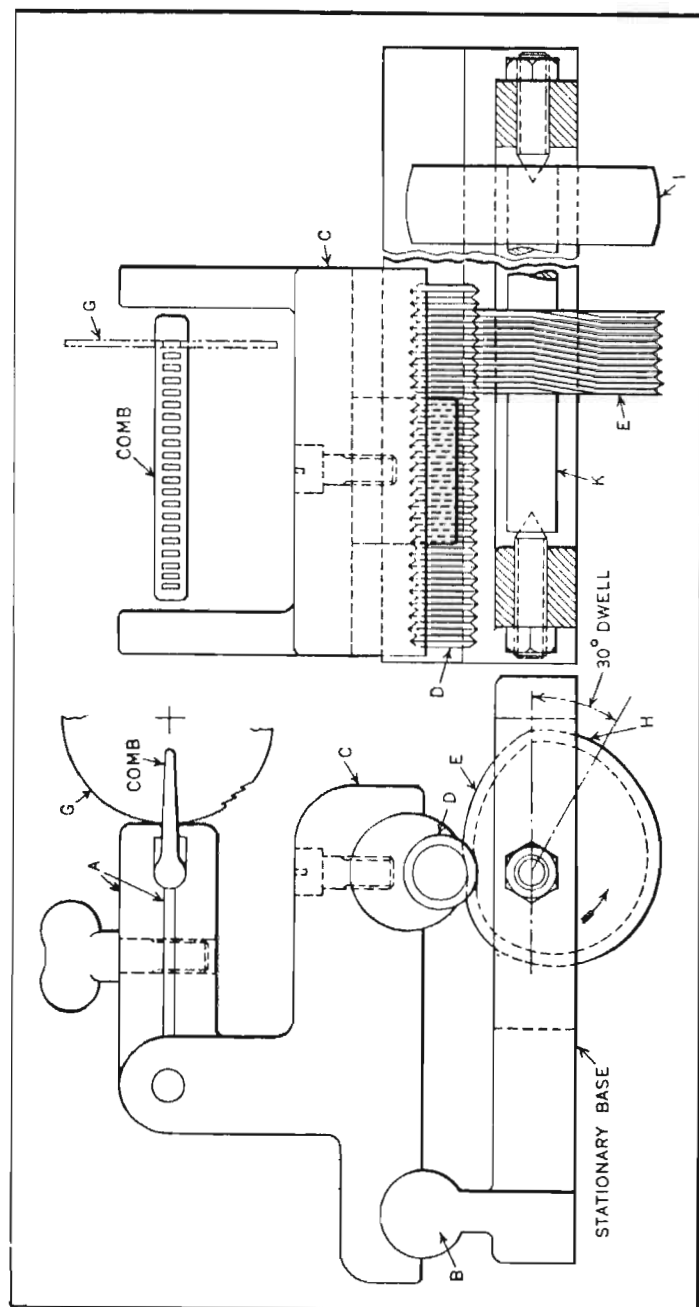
Mechanism in which a Cam Imparts an Oscillating Movement Followed by a Horizontal Indexing Movement
